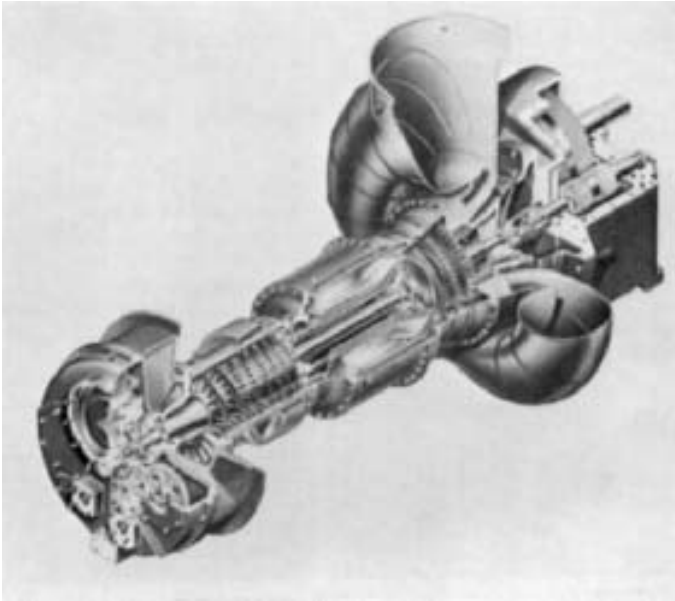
Cutaway view of 1100-bbp (820-bkW) split-shaft gas turbine driver (Solar Division of International Harvester)
